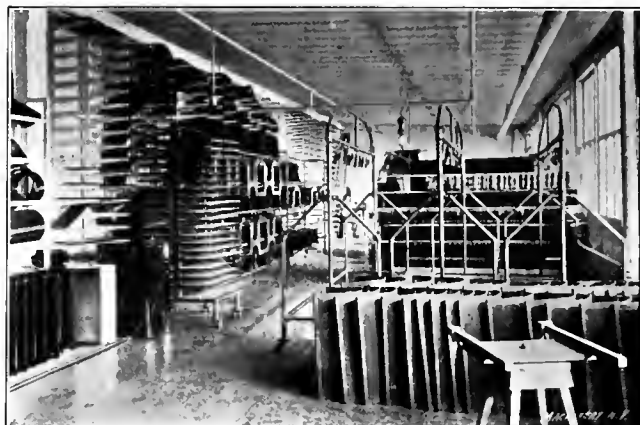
Storage of Enameled Parts, showing Wheeled Stands used in the Baking Ovens.
